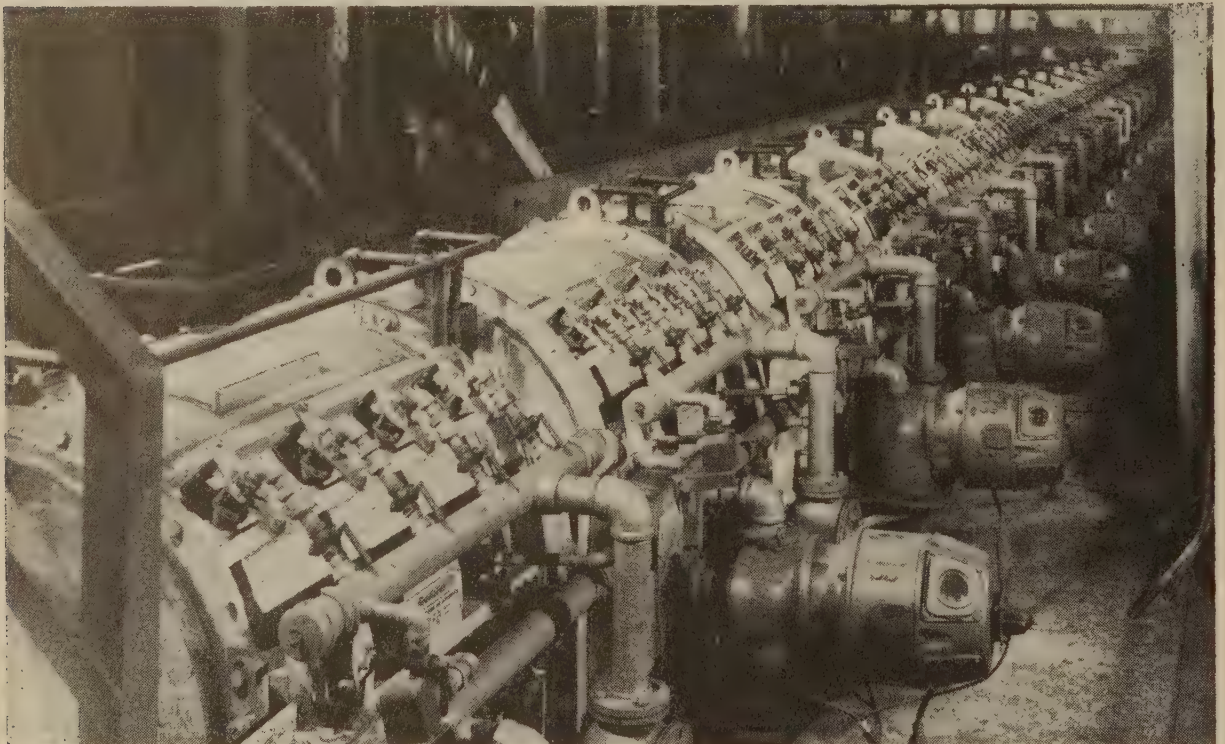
View of the 13-cylindrical tube furnaces that form a continuous line for reheating pierced tubes for sizing in the Gary plant of National Tube Co.
